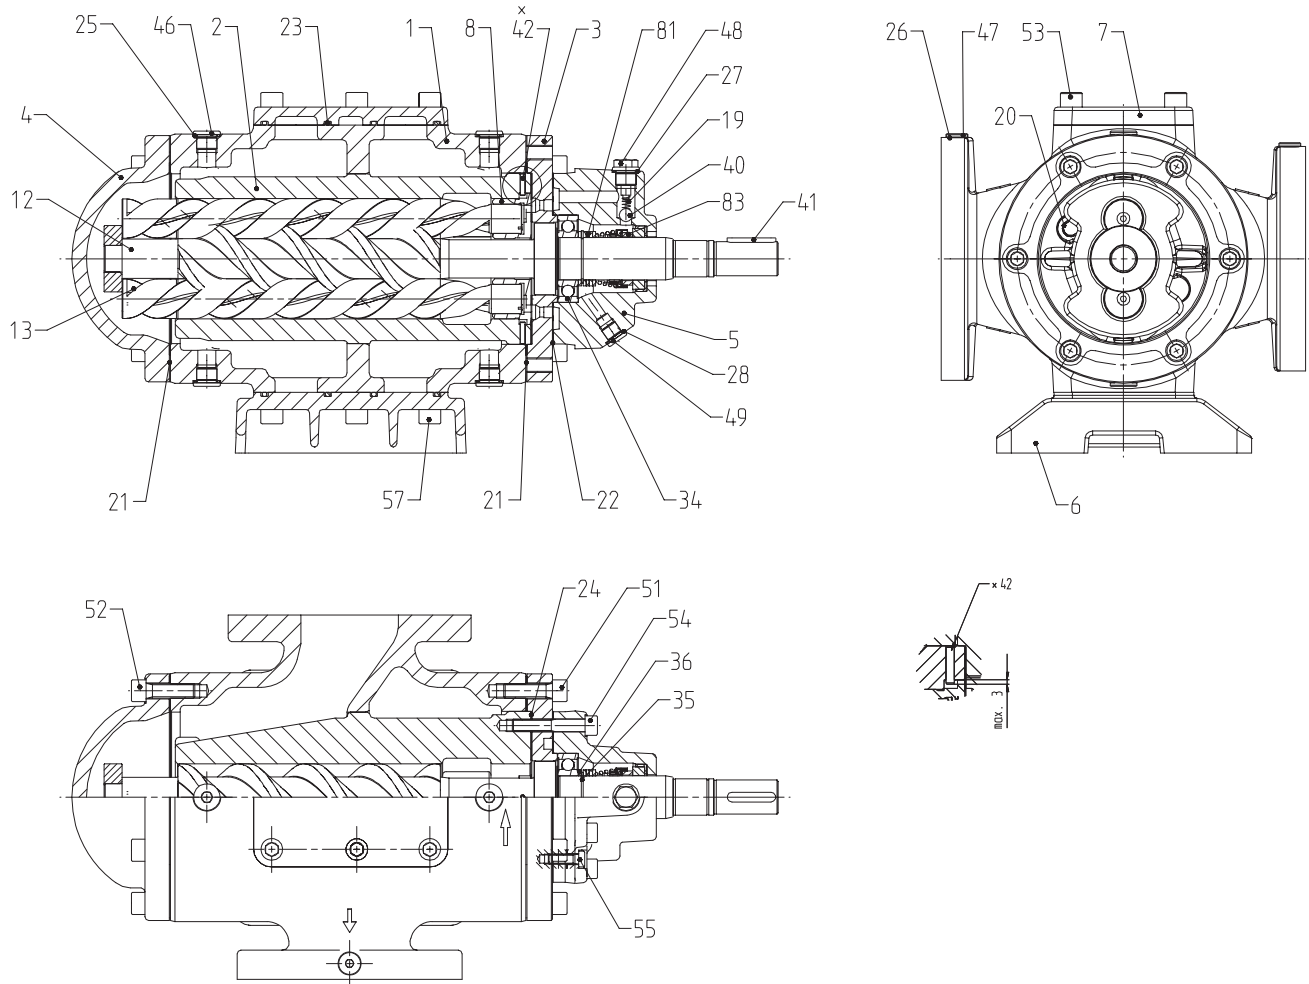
SNH..ER..U, SNH design, internal bearing, mechanical seal
